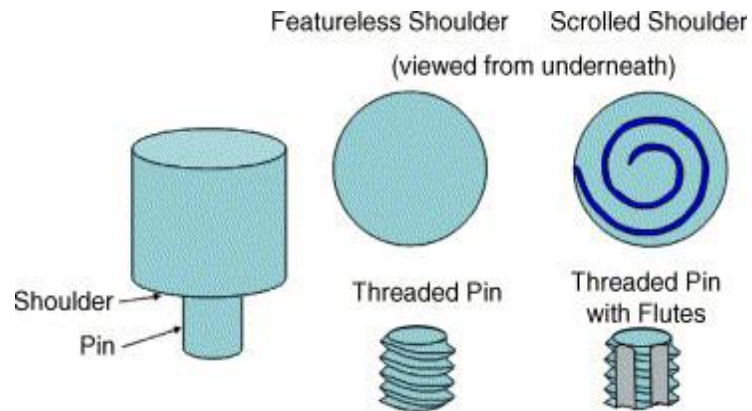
, FSW Tool Geometry (Mishra et al., 2005)
